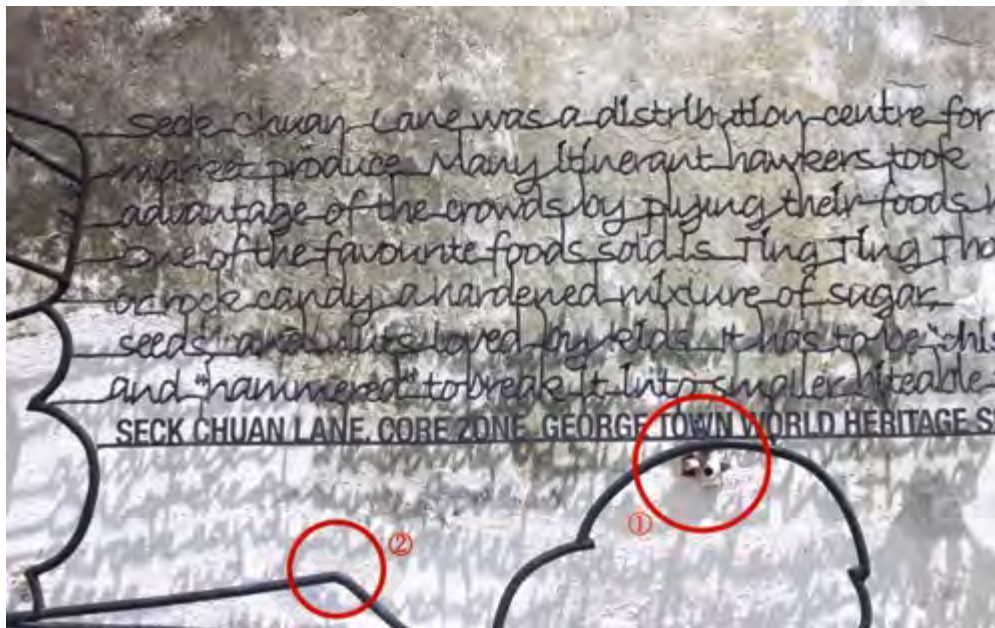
The screws and welding for fasten and the ground weld²⁰
